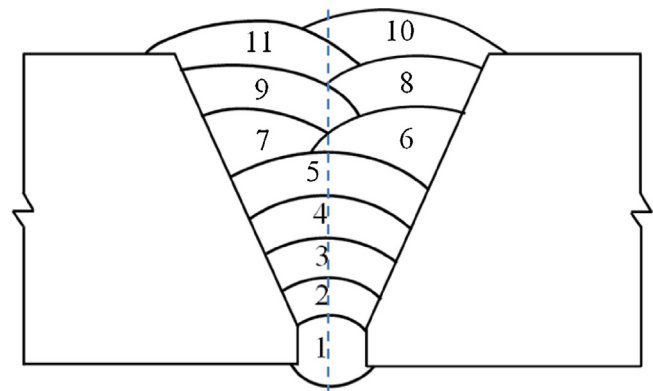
Weld deposition sequence in Specimens II and III.
